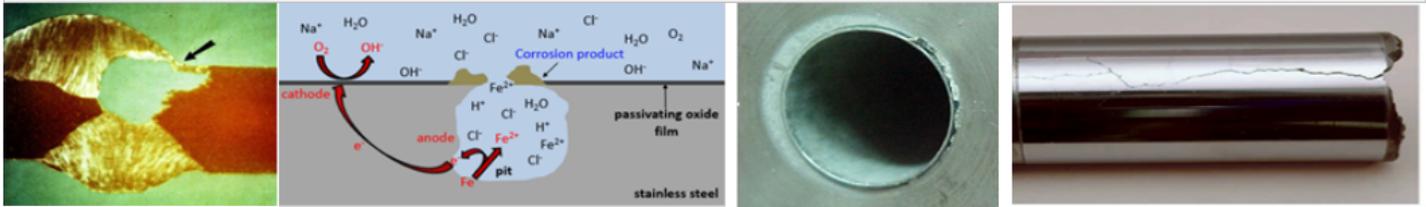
CRA Materials Selection - Comparing the Pitting Resistance of Plate vs Weld
